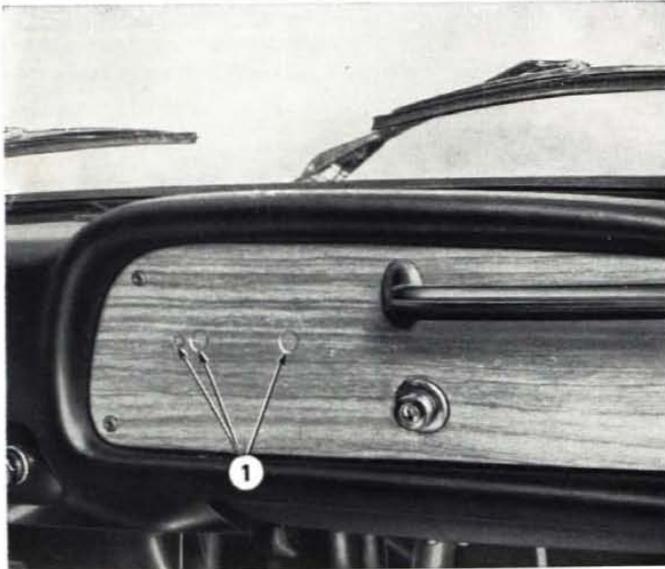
Instrument panel with location marks for drilling radio receiver mounting holes.
